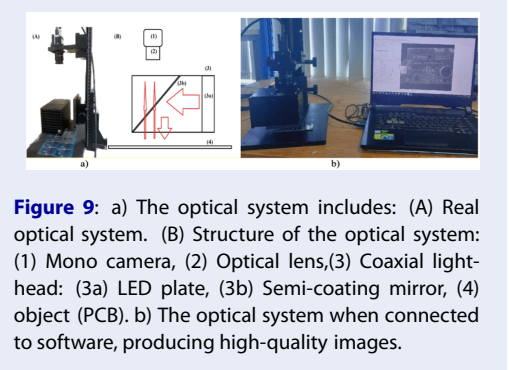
a) The optical system includes: (A) Real optical system. (B) Structure of the optical system: (1) Mono camera, (2) Optical lens, (3) Coaxial light-head: (3a) LED plate, (3b) Semi-coating mirror, (4) object (PCB). b) The optical system when connected to software, producing high-quality images.
